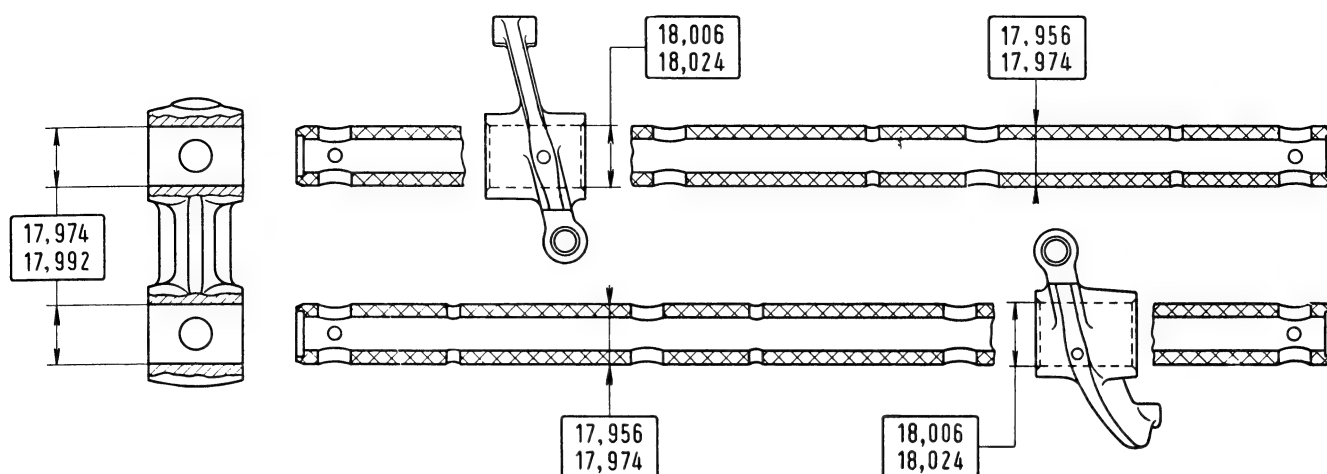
Critical dimensions of 115 C.005 engine rocker shafts, supports and rocker arms (in mm).
